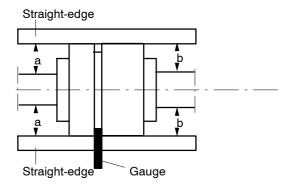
Aligning the coupling with the help of a gauge and a straight-edge
